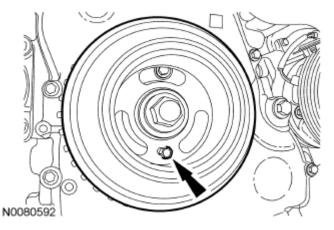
View Of Crankshaft Pulley And 6mm x 18 mm Bolt Courtesy of FORD MOTOR CO.
